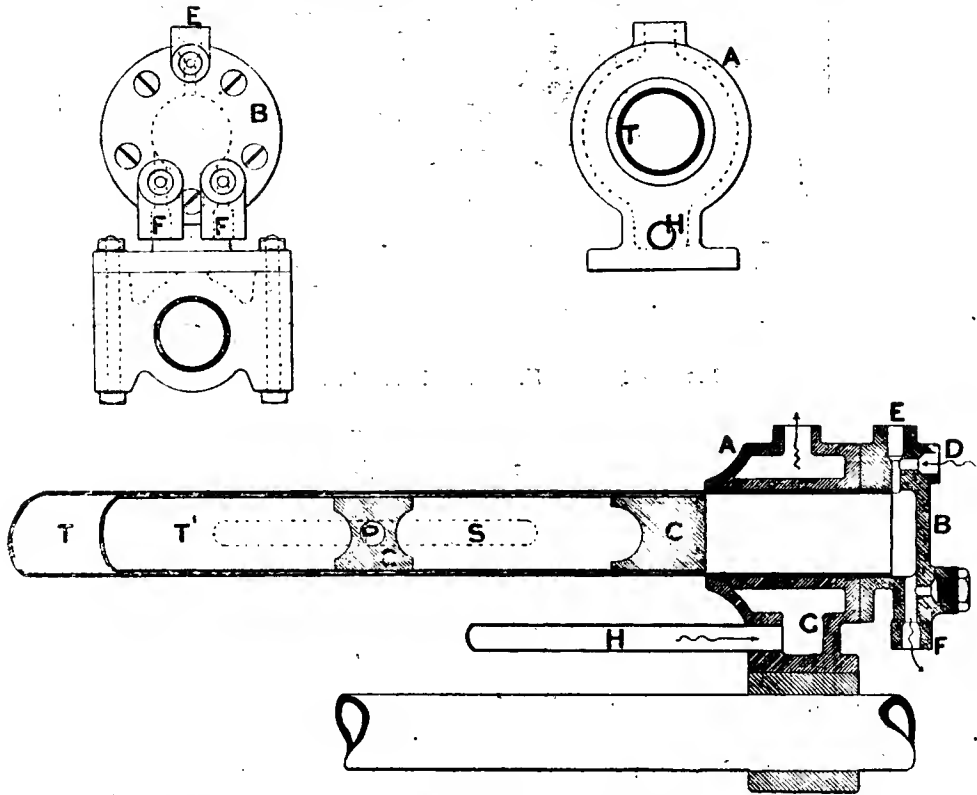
CRASTIN'S MOTOR QUADRICYCLE—ONE END OF MOTOR CYLINDER AND PISTON.
